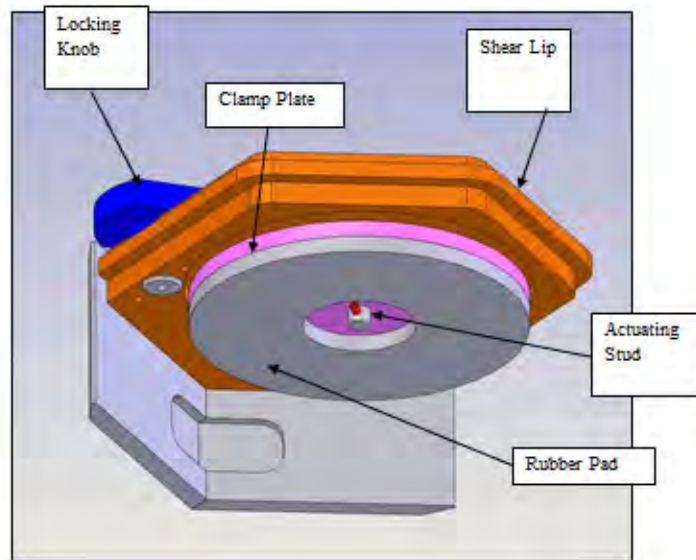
Traveller VVER Clamshell Top Plate Assembly
